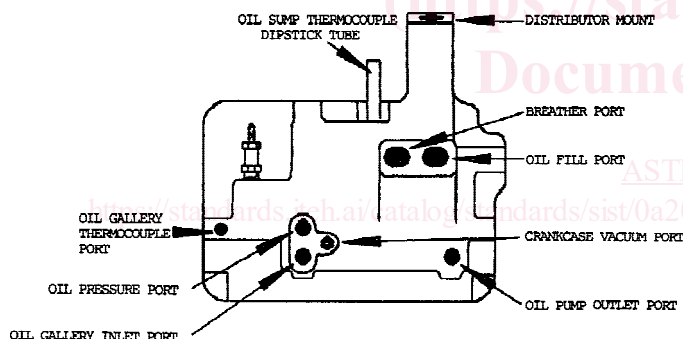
Oil Gallery Side Cover for the L-38 Engine Power Section
